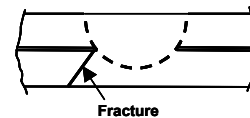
P Fracture in a lap joint, tested in tension-shear.
